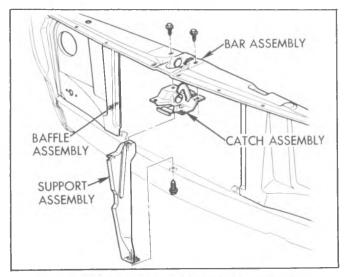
C-6--Hood Lock Catch Assembly-G Series
